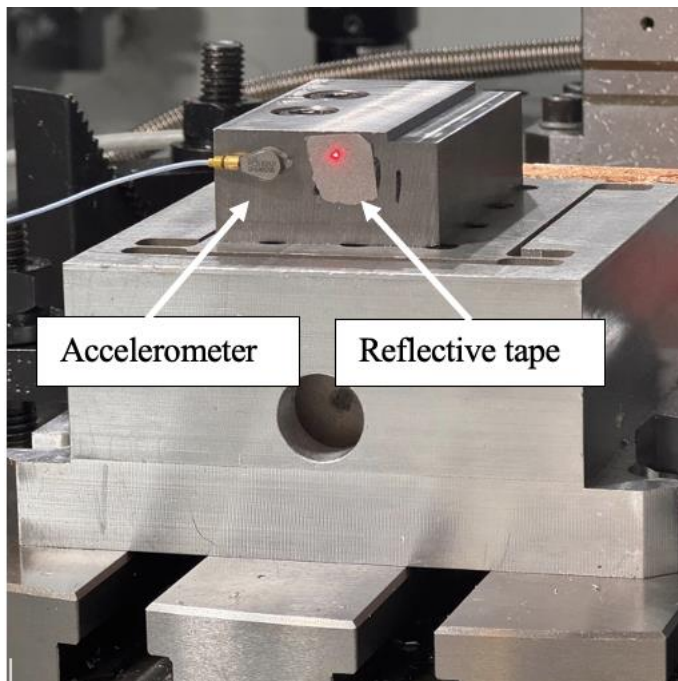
Accelerometer and laser vibrometer reflector tape mounted onto workpiece.
